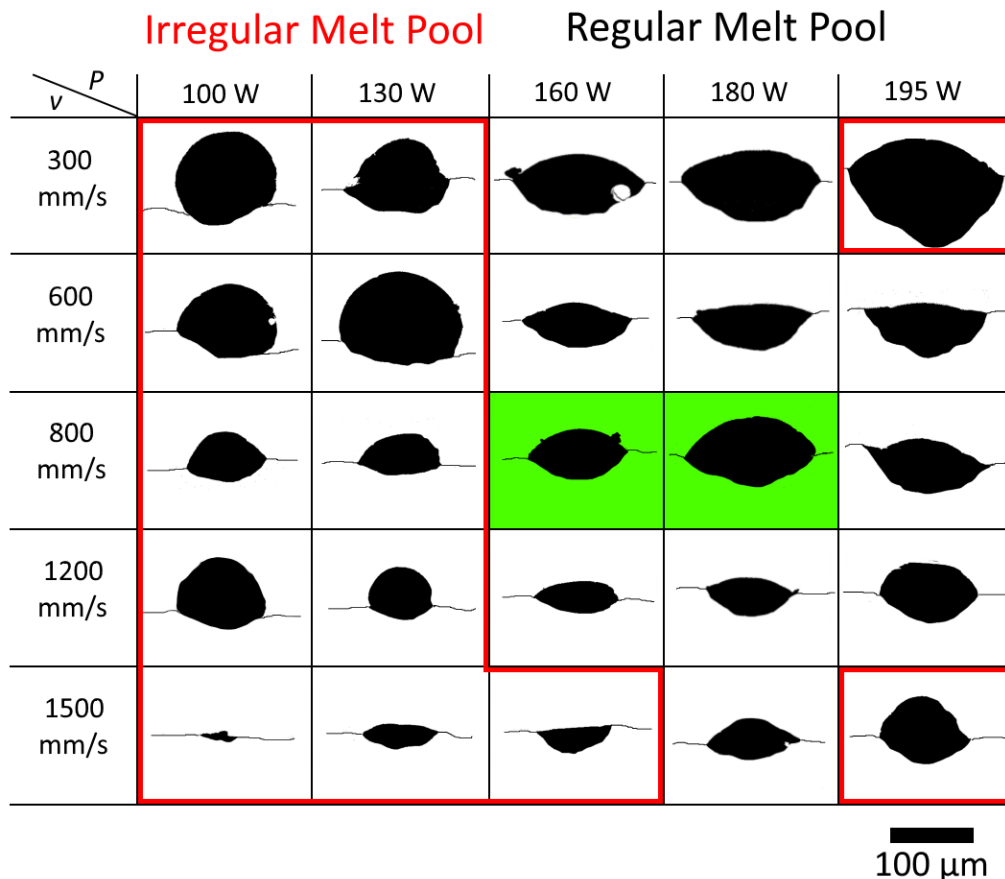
Melt pool cross-sections of single scan tracks manufactured in the first SSTs job.
